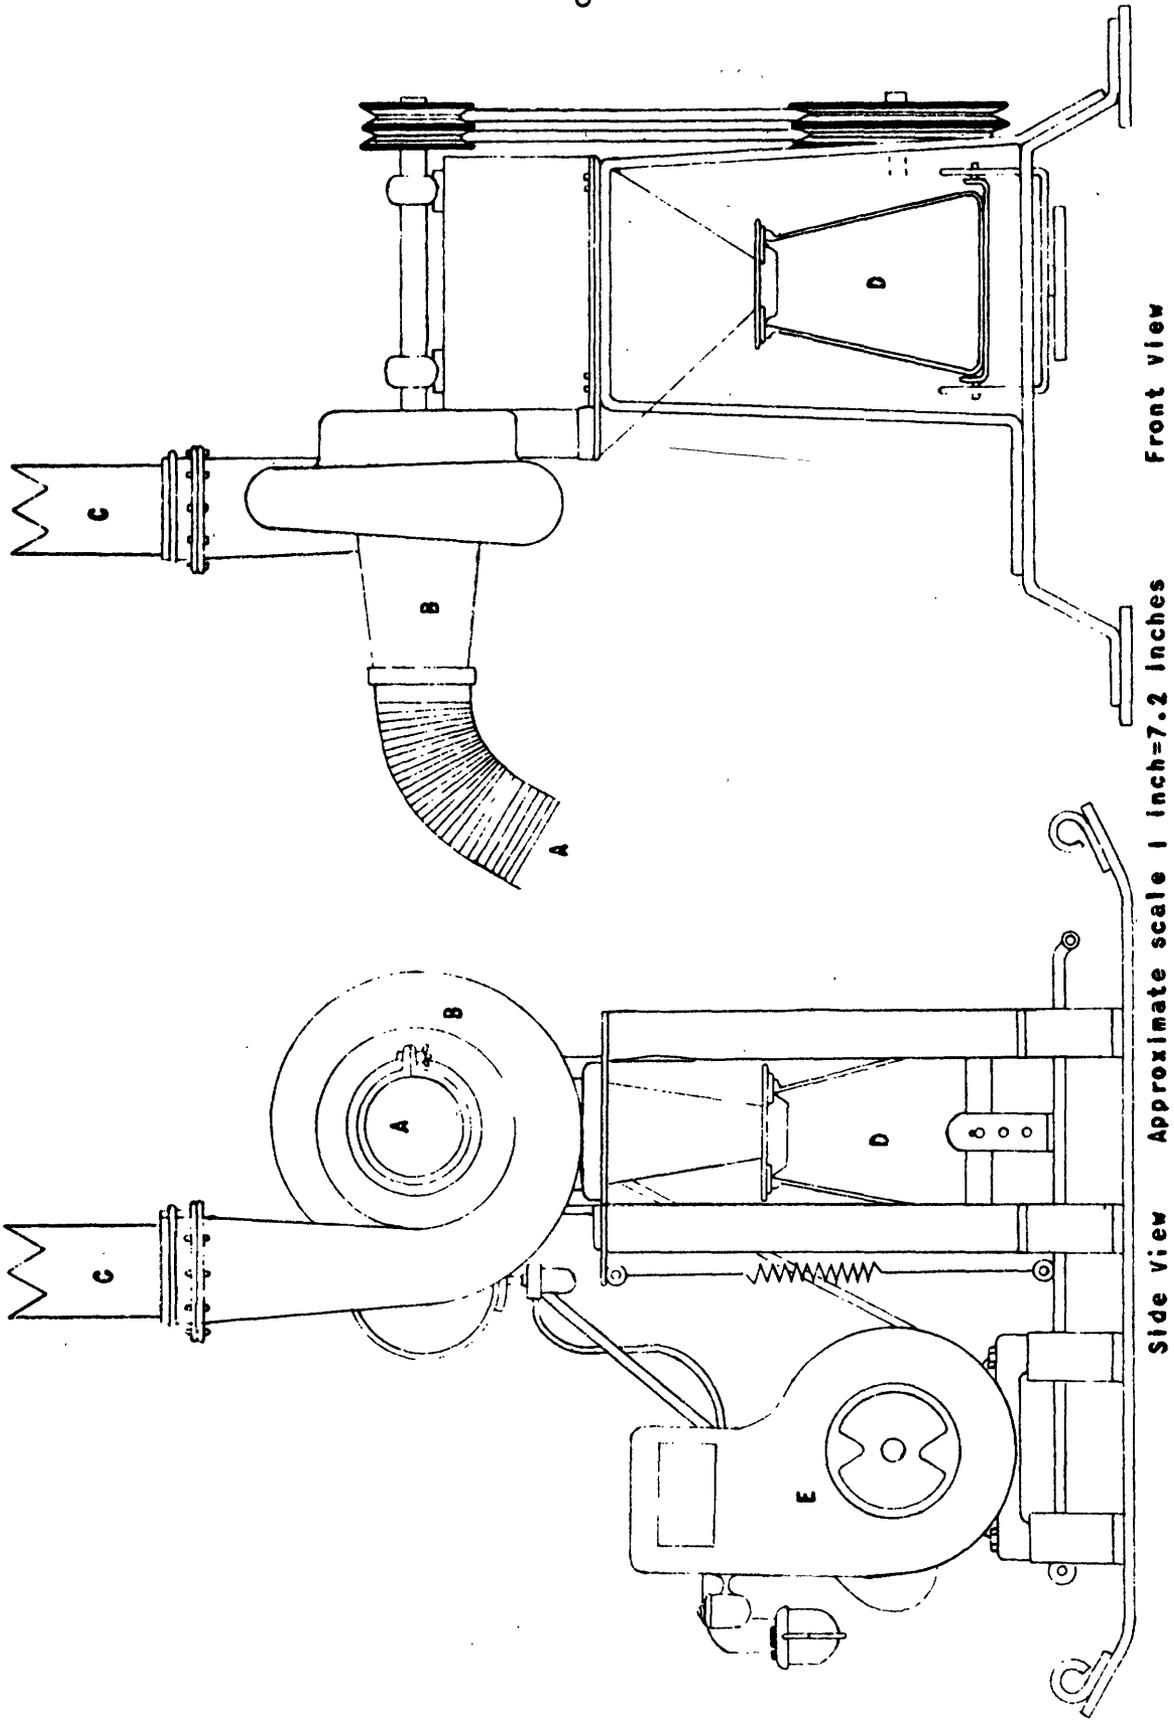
Sketch of Machine A showing component parts: (A) intake, (B) fan housing, (C) exhaust tube, (D) jar, and (E) motor. (Modified from Huleatt, 1952)
